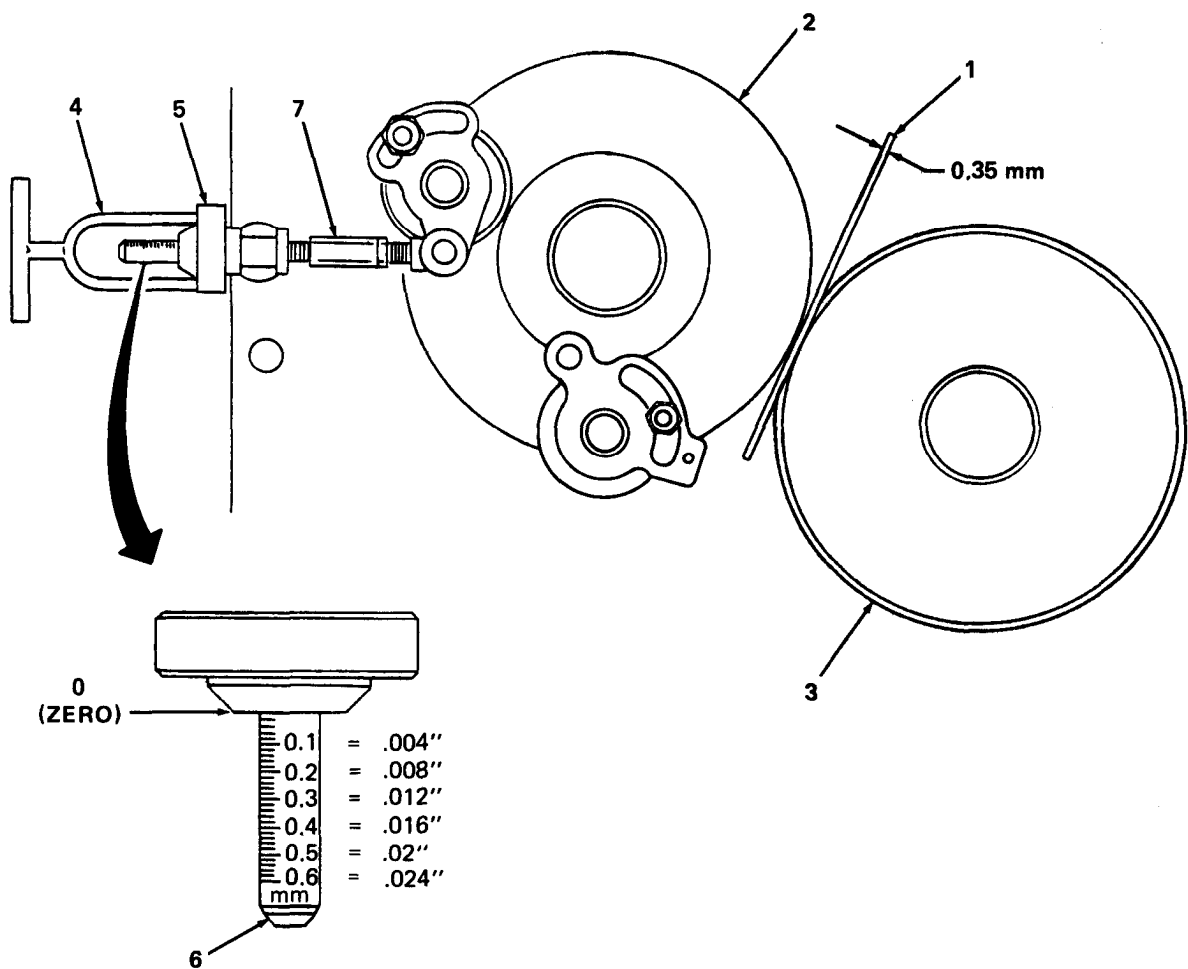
Spring Loaded Supporting Rollers, Blanket Cylinder, Adjustment.
